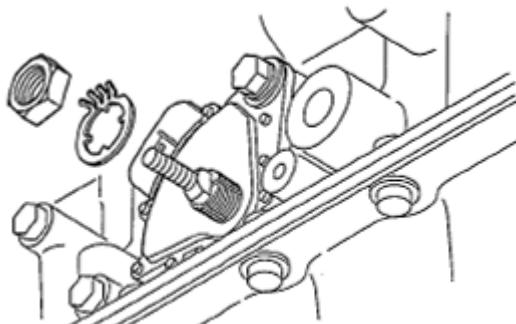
Lifting Up Lock Washer Using Flathead Screwdriver
